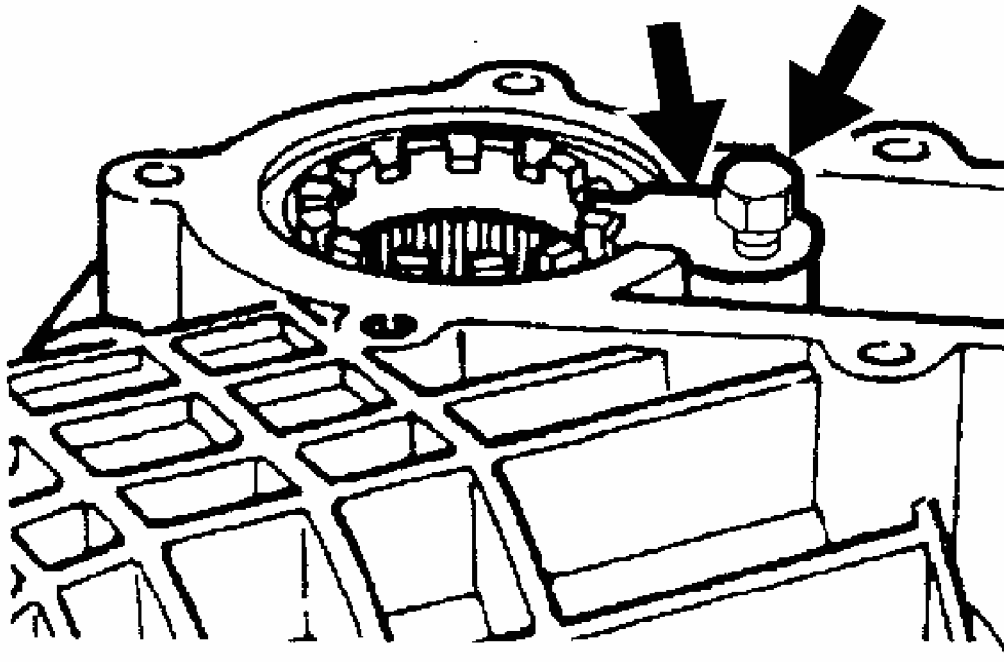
View Of Differential Adjuster Nut Lock Tab Bolts
